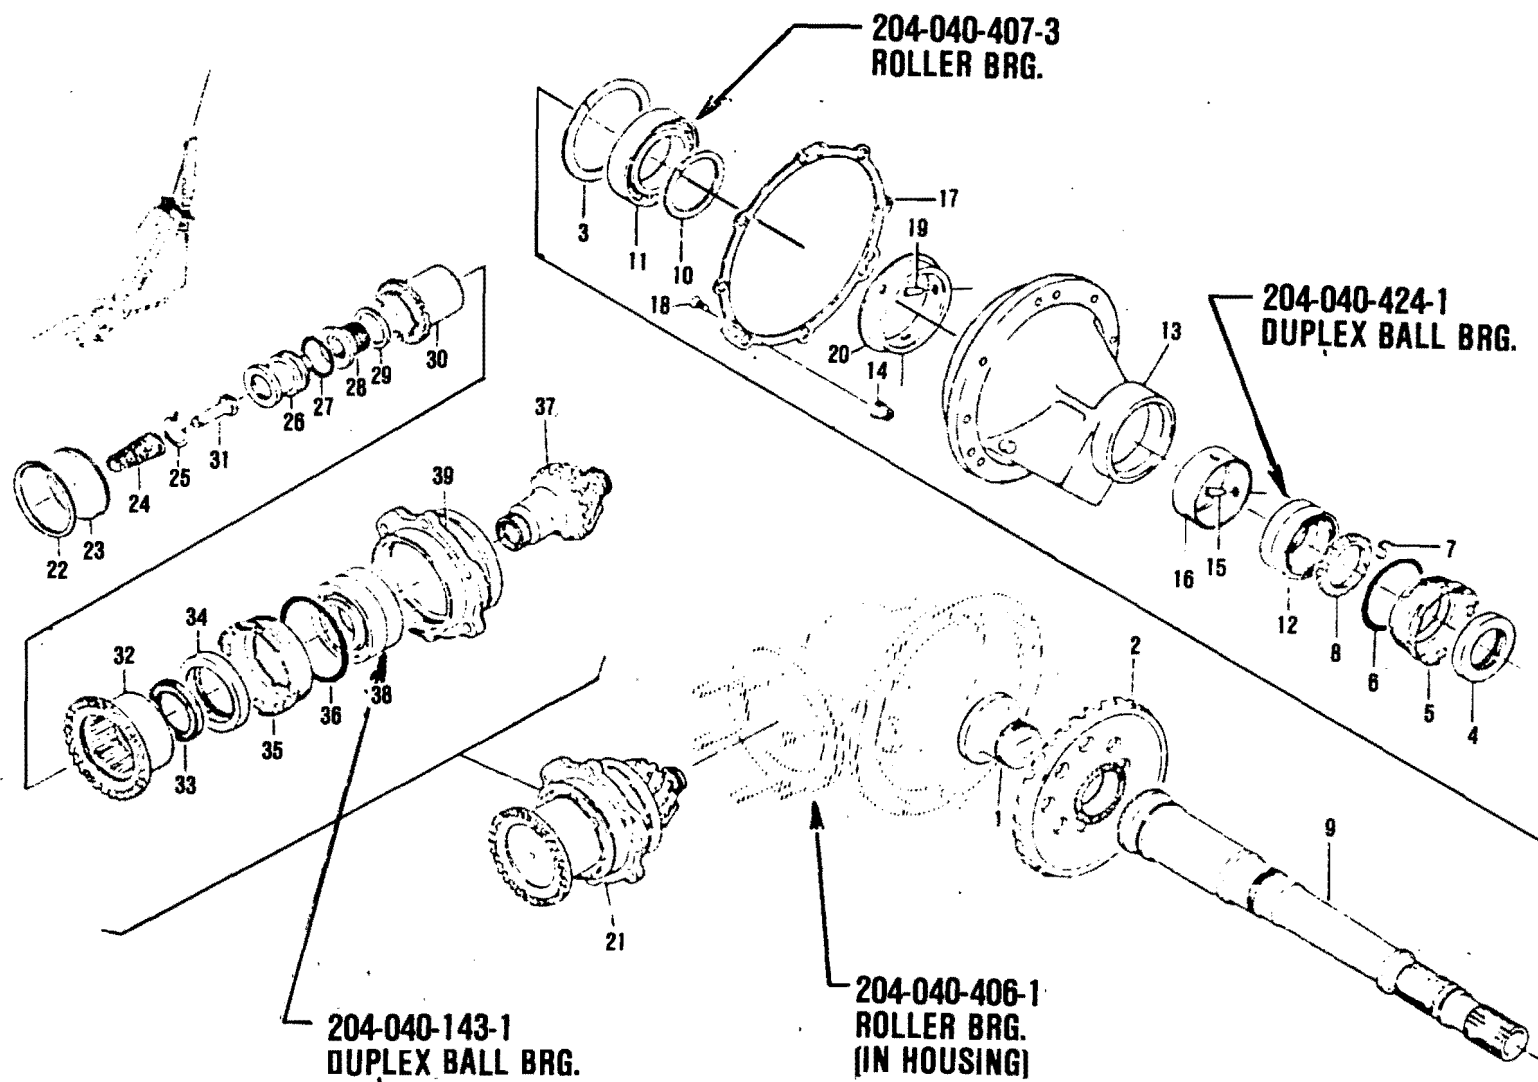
Quill Assembly, 90-Degree Gearbox, UH-1H
